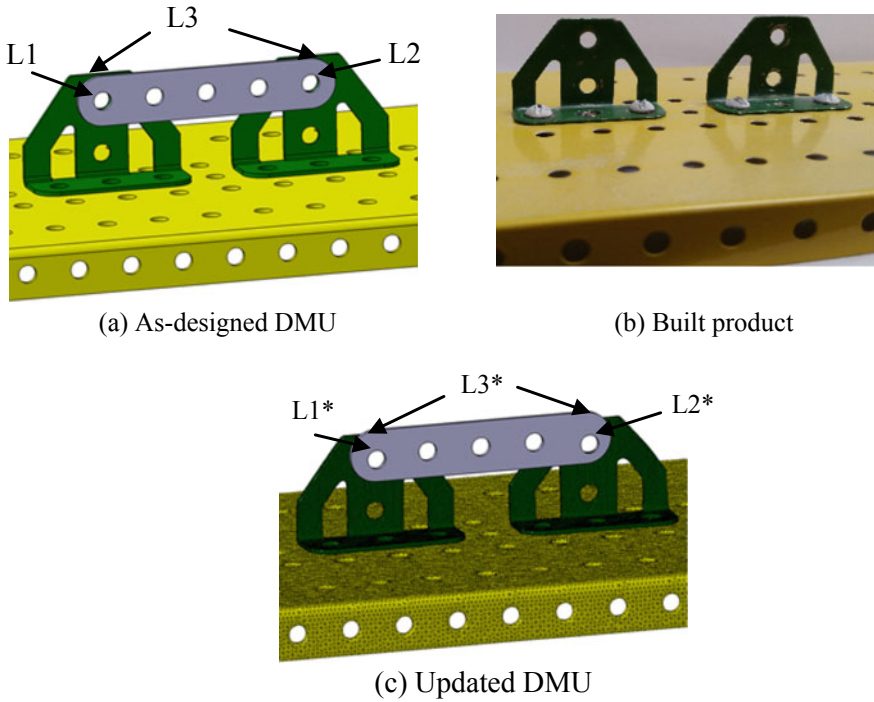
The product as-designed model (a) is updated to reflect the built components at a given assembly step (b), following manufacturing and assembling operations are also impacted (c)
